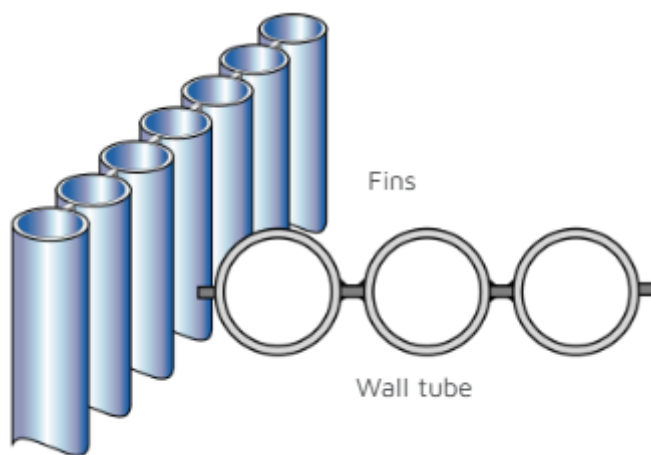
Boiler tube membrane design (Valmet 2025)
